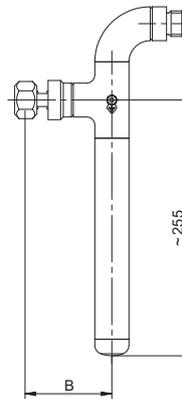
Device for barrel assembly with union nut suitable for barrel valves with straight outlet
